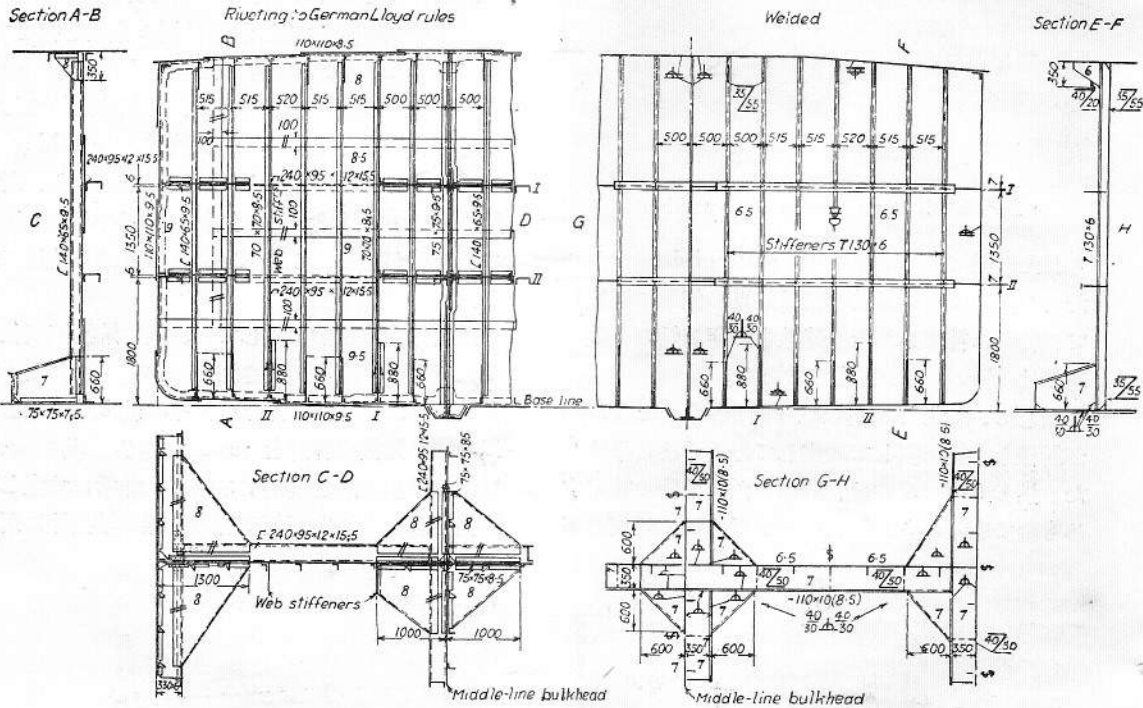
Bulkhead, Riveted and Welded.
